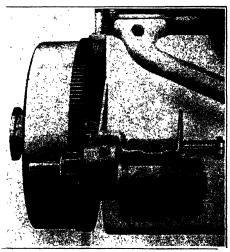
Double-Reducing Gear Type Installation, Wagner Starting Motor
